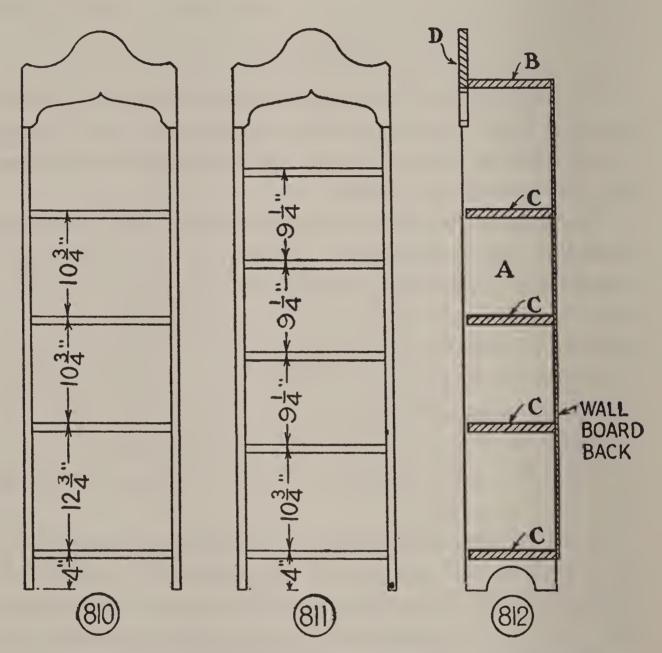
Front Elevation of Pier Cabinet Shown in Fig. 797. Fig. 811.—Front Elevation Showing Spacing for Five Shelves. Fig. 812.—Cross-Section of Cabinet.
